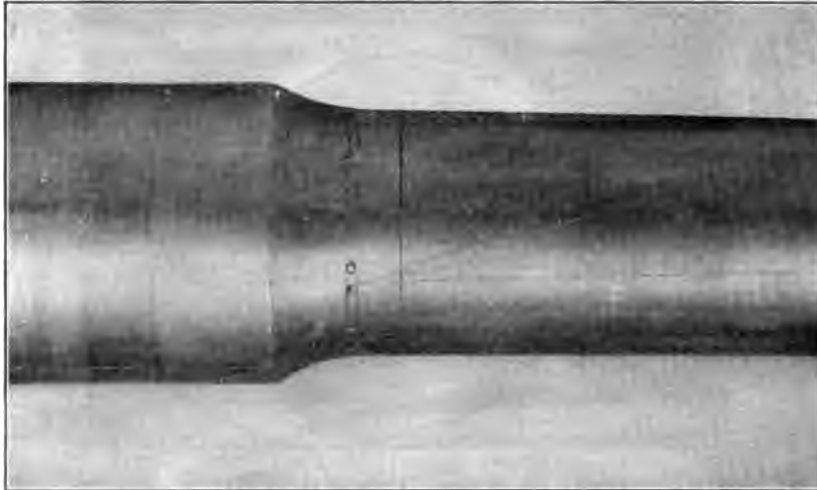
LINES SHOWING PLANES OF CLEAVAGE IN A SHAFT ABOUT TO BREAK
